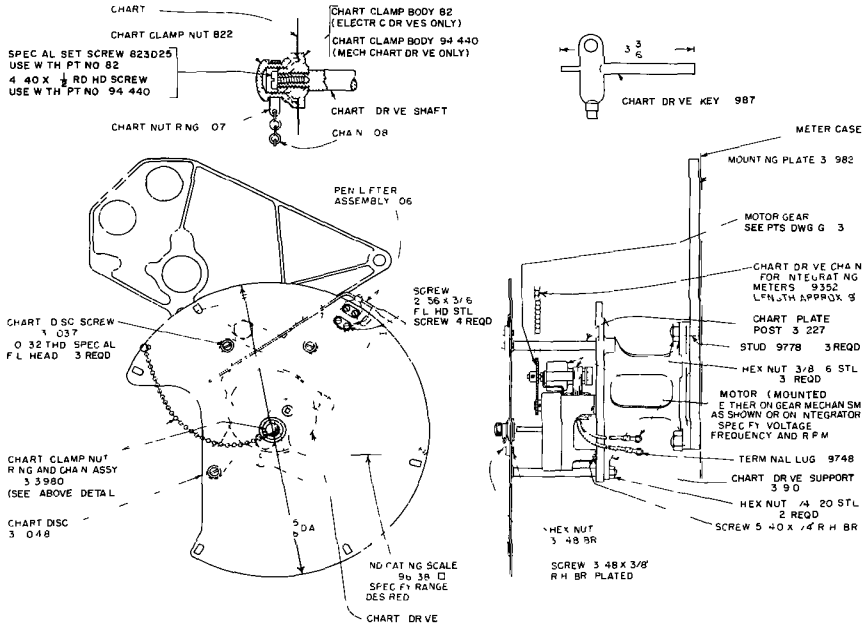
Parts Drawing G92 35, Chart Plate and Chart Drive
